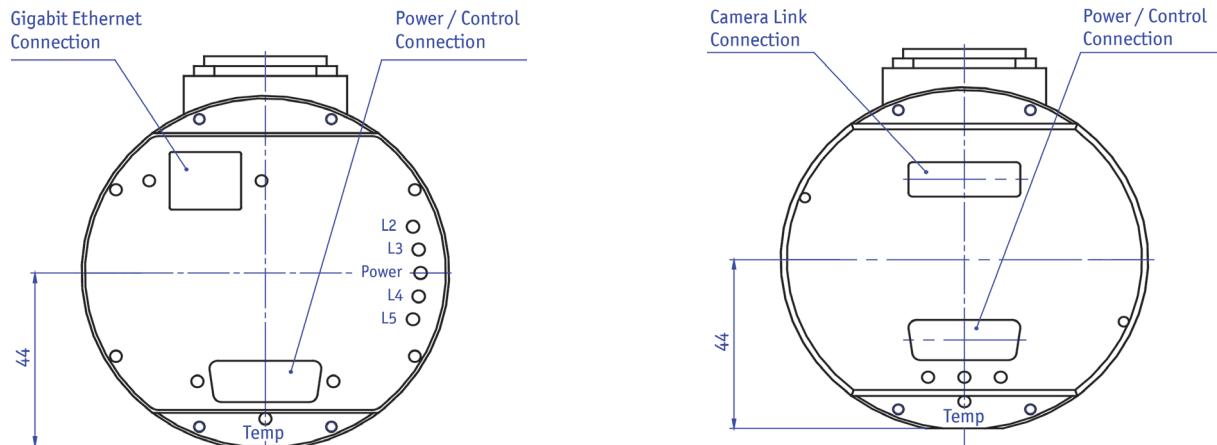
Camera dimensions: Goldeye P-008 SWIR Cool
